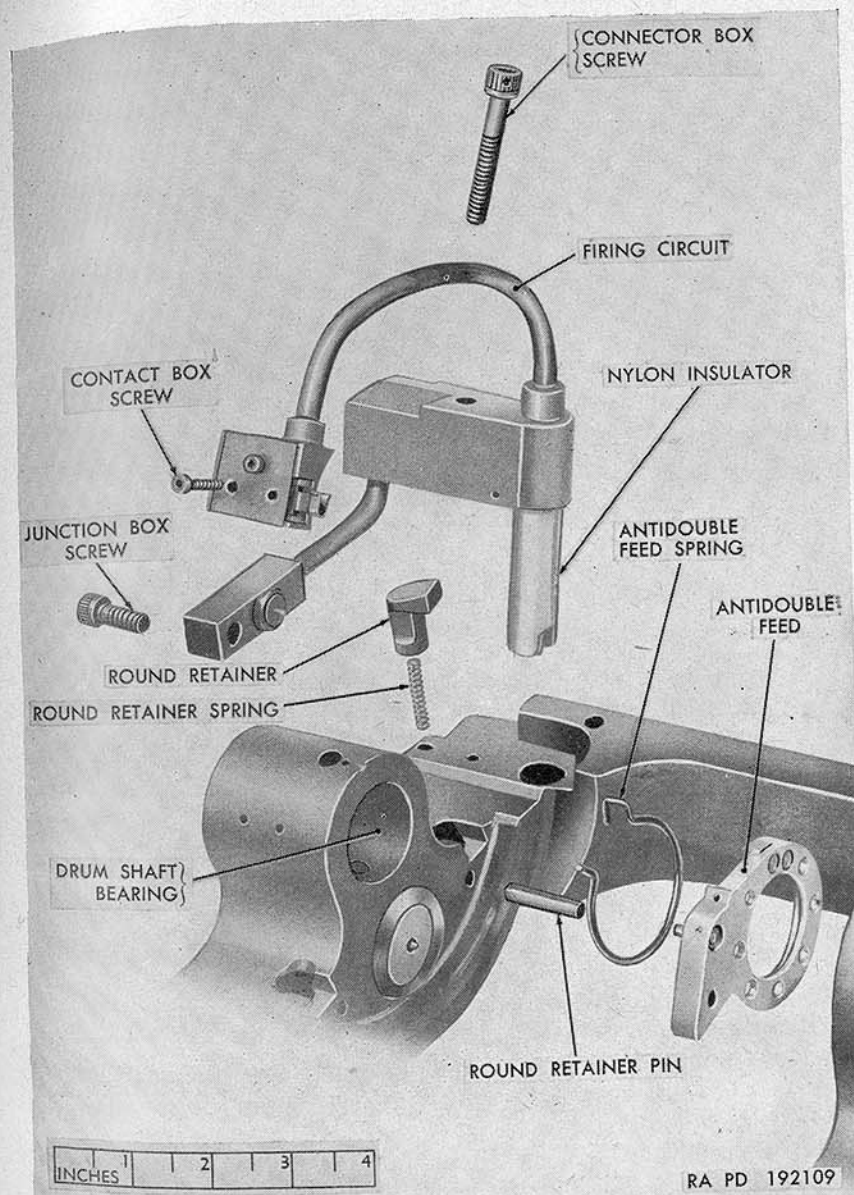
Firing circuit, round retainer group, and antidouble feed—exploded from drum cradle.
